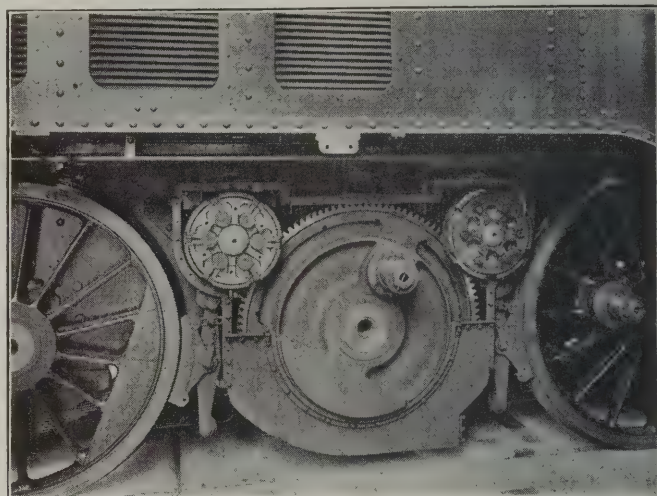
Showing the Arrangement of the Gear Connections on the Type 1B-B1 Locomotive
